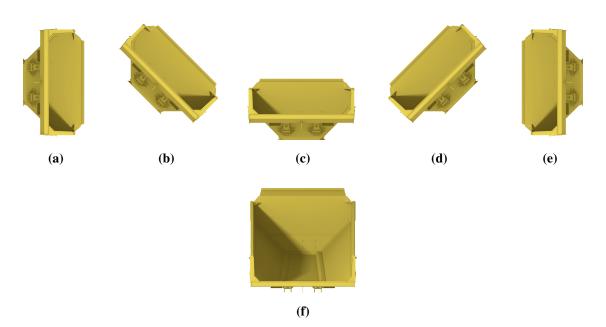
Required welding positions for wear plate welding. (a) 90° rotation and 0° tilt. (b) 45° rotation and 0° tilt. (c) 0° rotation and 0° tilt. (d) -45° rotation and 0° tilt. (e) -90° rotation and 0° tilt. (f) 0° rotation and 20° tilt.
